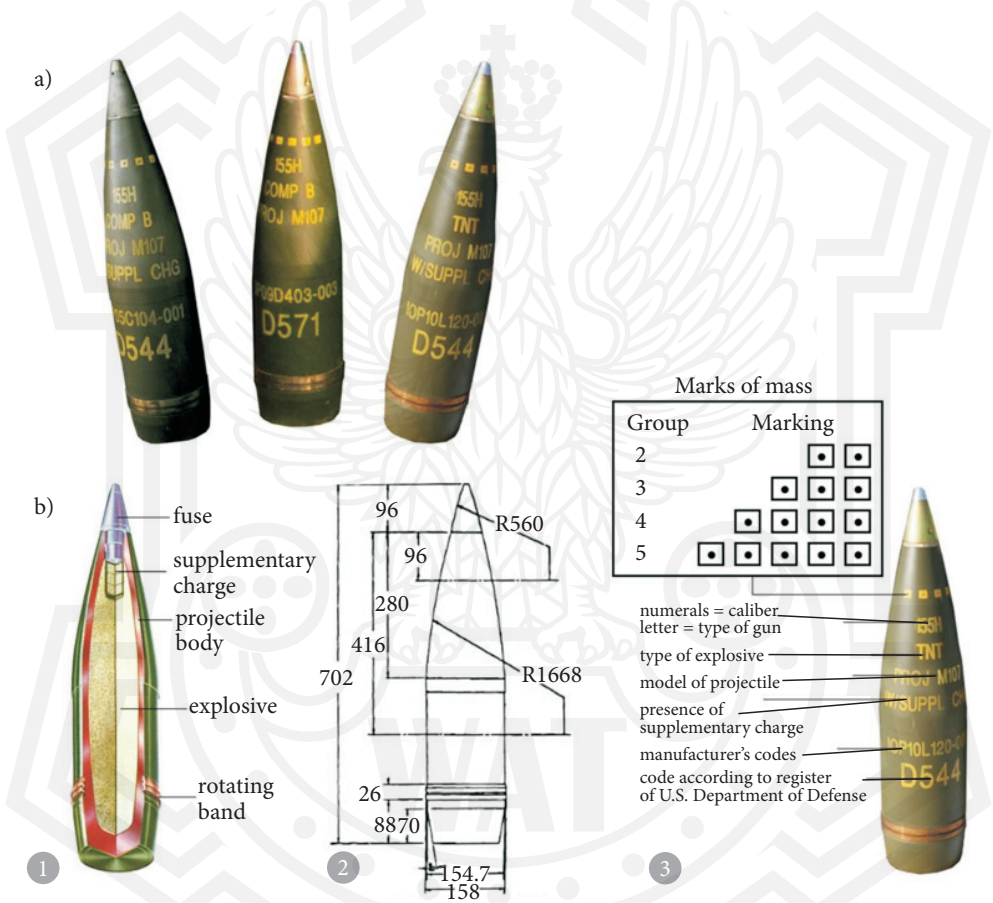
M107 projectile of 155 mm caliber: (a) = appearance; (b) = designations: 1 = constructive composition; 2 = geometric dimensions, mm; 3 = marking of the projectile on the body
